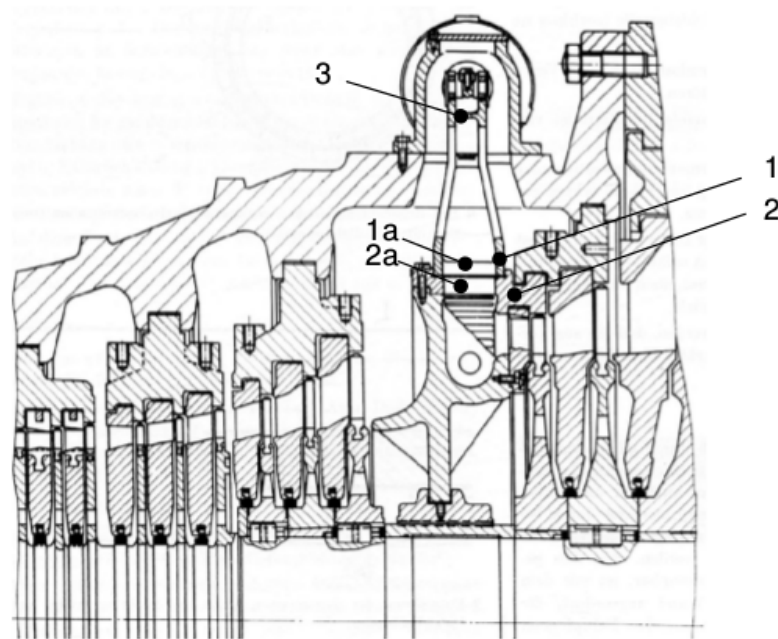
Extraction Turbine Using Radial Rotary Valve and its Actuating Mechanism [15]
